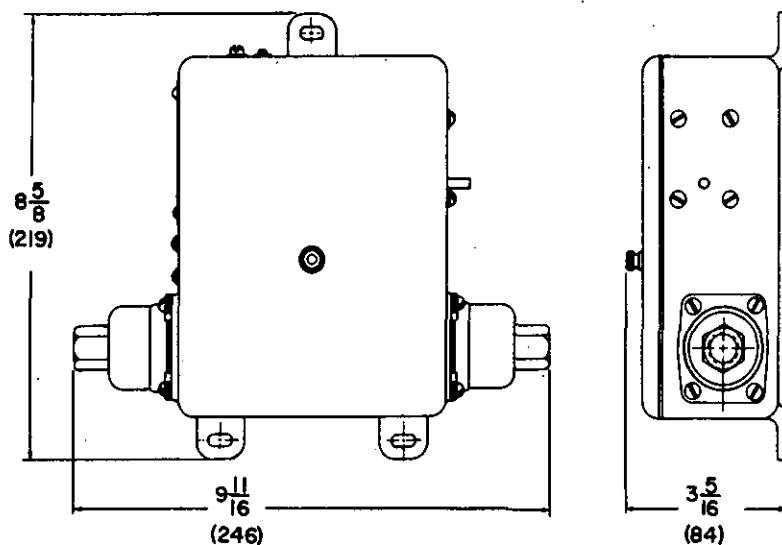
PP903A APPROXIMATE DIMENSIONS IN INCHES (MILLIMETERS)
